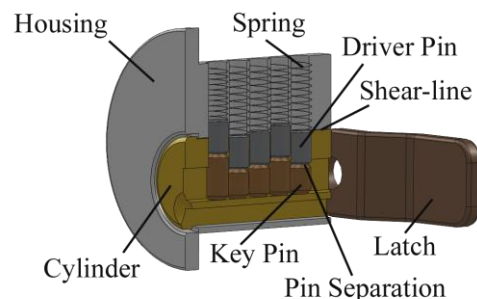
Cross-sectional view of a pin-tumbler lock with latch.
